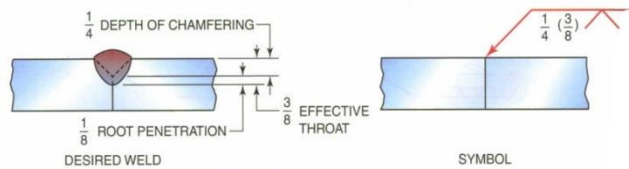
Showing size and root penetration of grooved welds. Courtesy of the American Welding Society.
